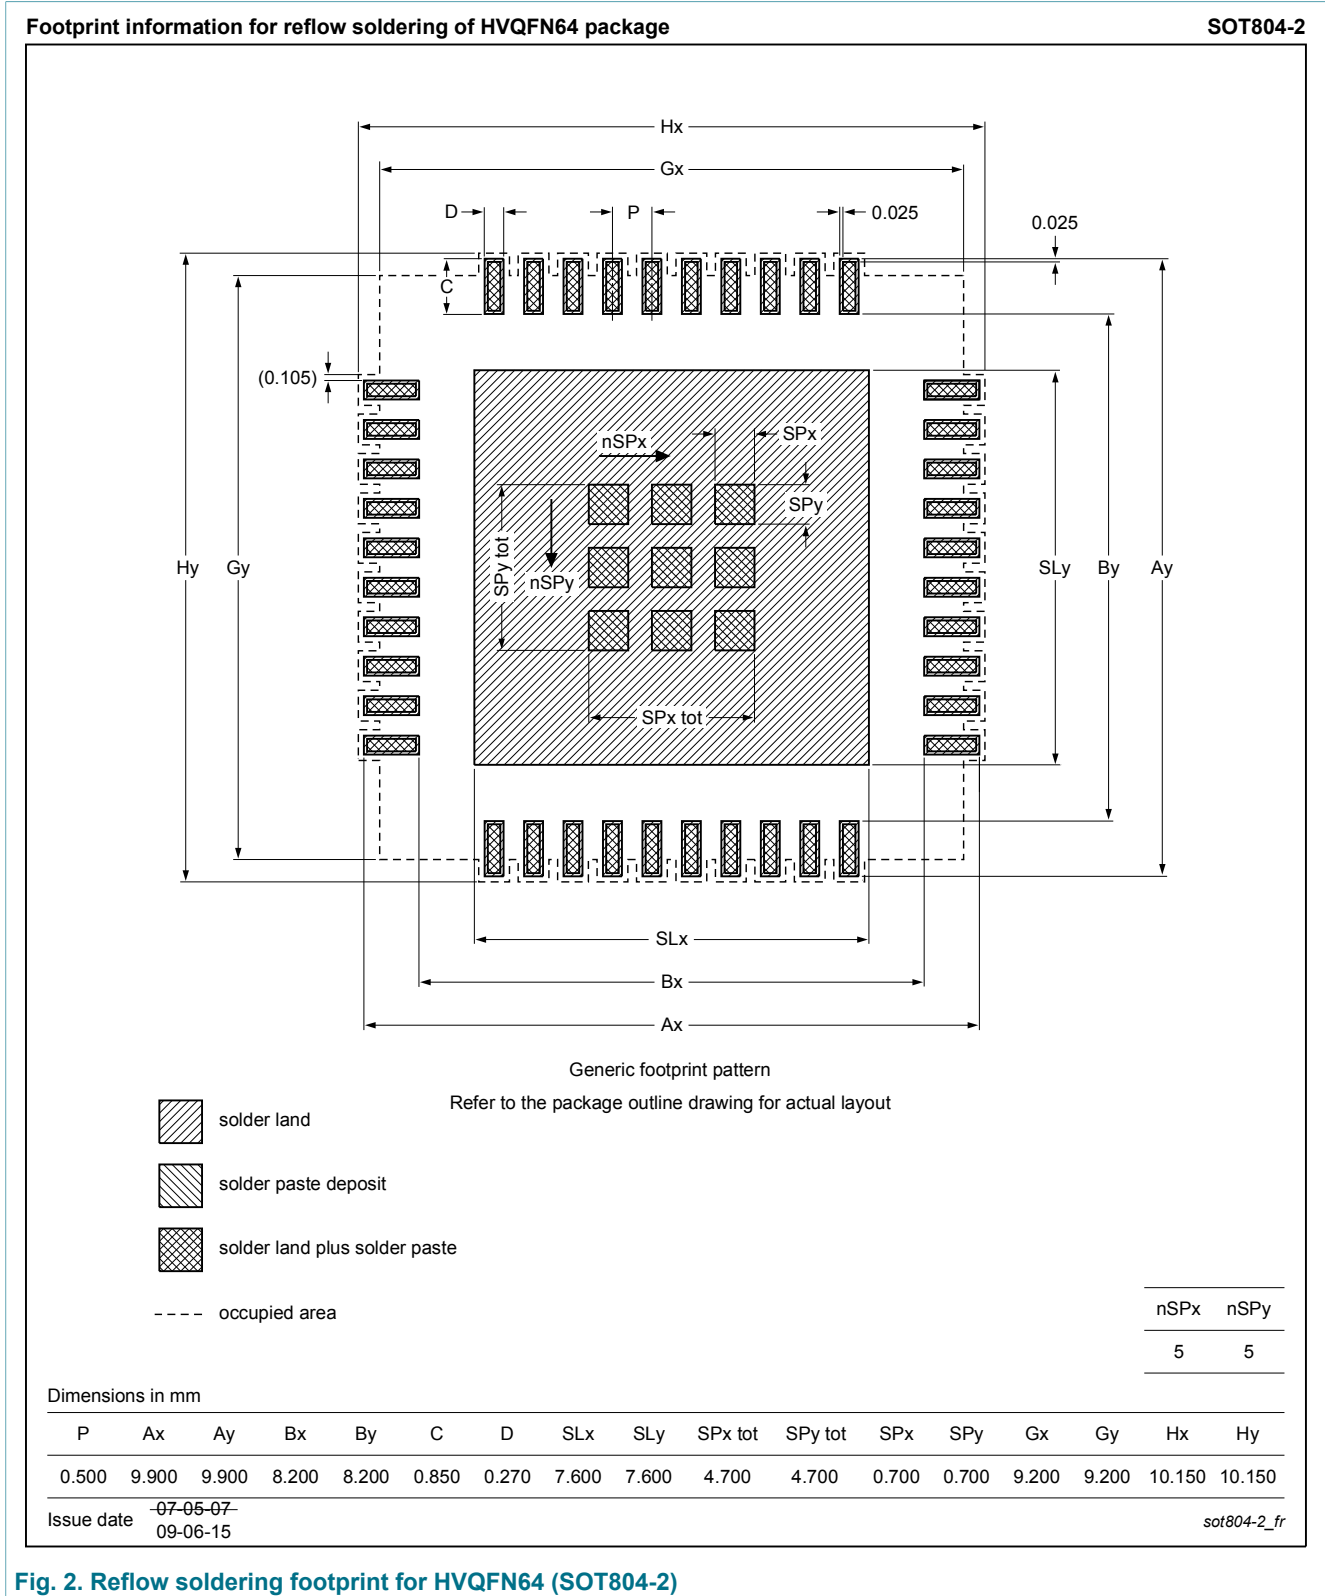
Reflow soldering footprint for HVQFN64 (SOT804-2)
